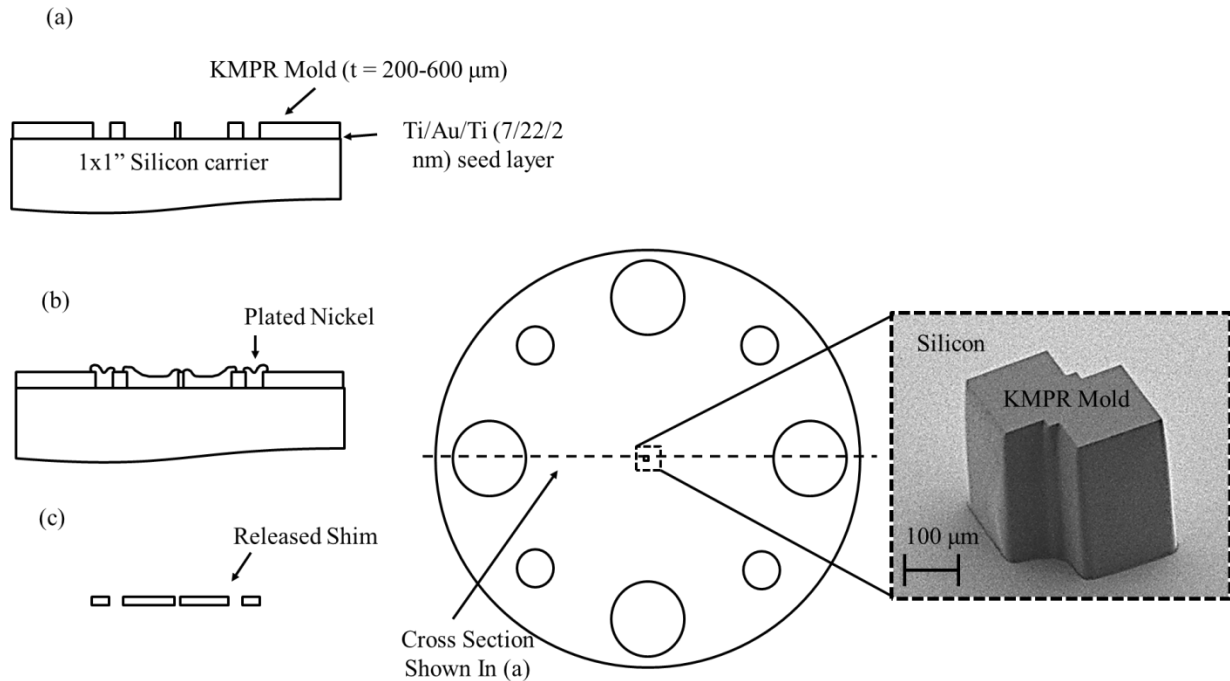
90° twist shim fabrication processing steps, (a) KMPR mold development, (b) nickel plating the KMPR mold, (c) releasing the nickel shim from the mold
